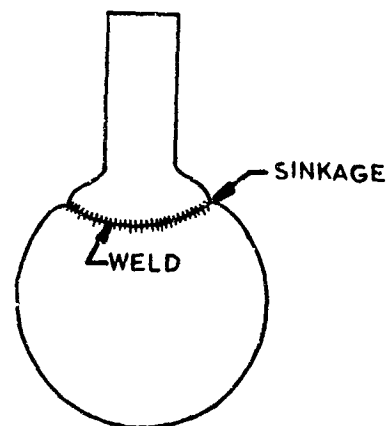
Weld Sinkage in Pressure Vessels
